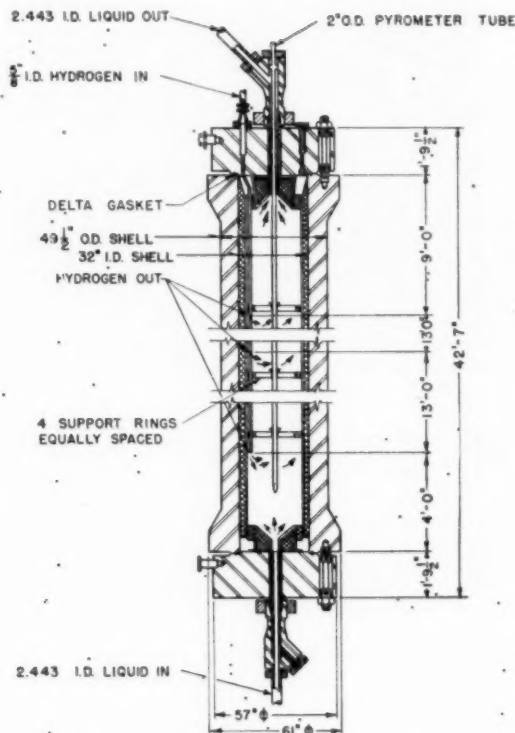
LIQUID-PHASE CONVERTER ASSEMBLY
